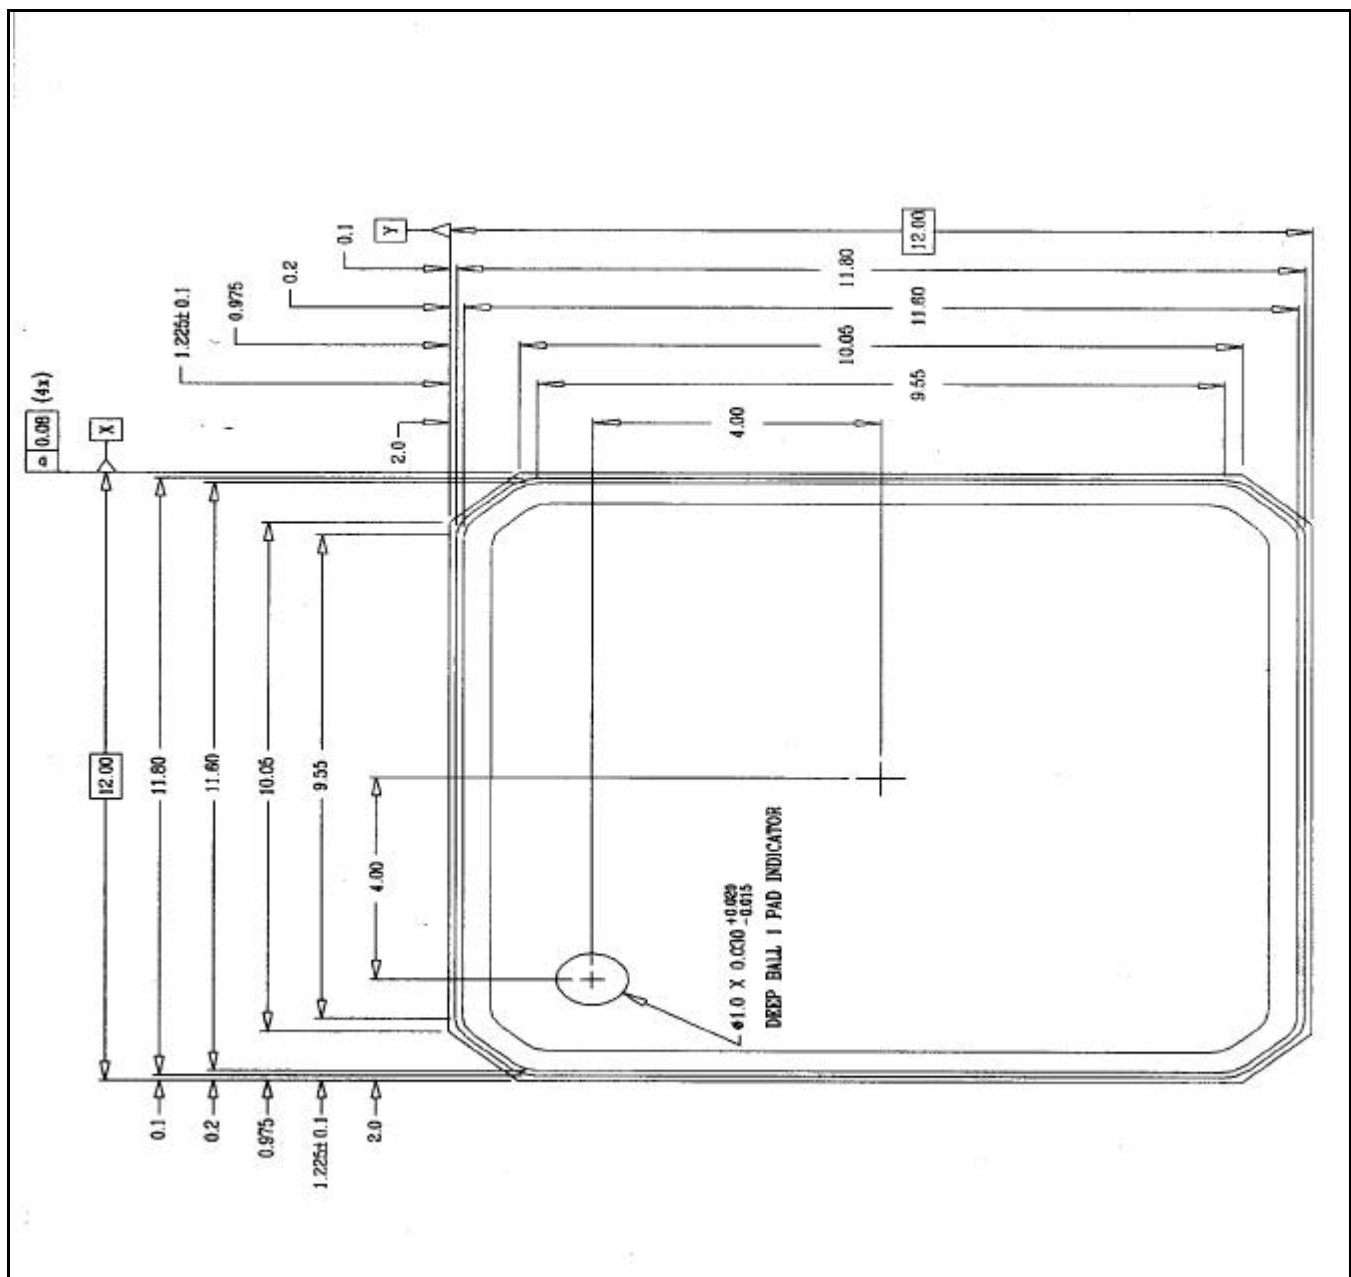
160-FBGA-12.0x12.0 Package Dimensions 1
